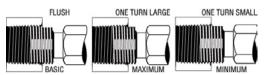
Gaging internal American National Taper pipe threads with working gage. When the internal thread is chambered, the gaging point shall be the intersection of the chamber and the pitch cone of the thread.
